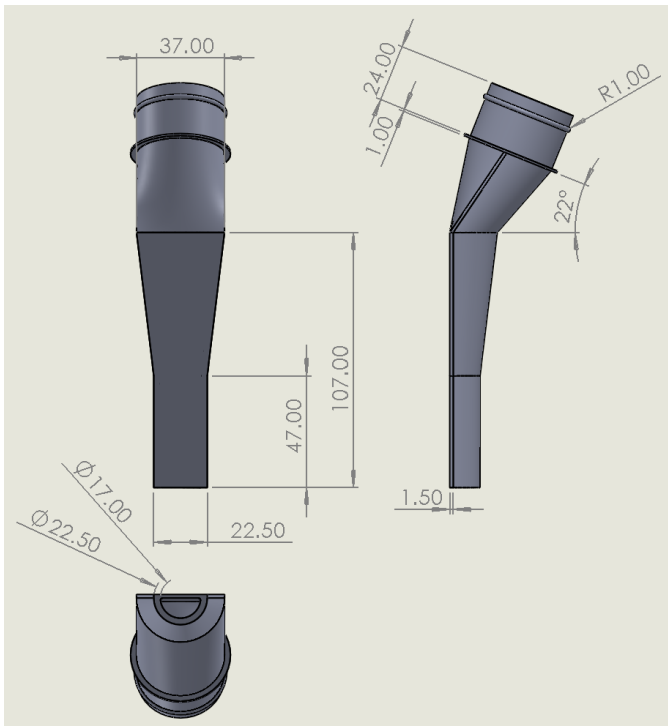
The SolidWorks design drawings for the 17 mm nozzle at 90° with dimensions in mm.
